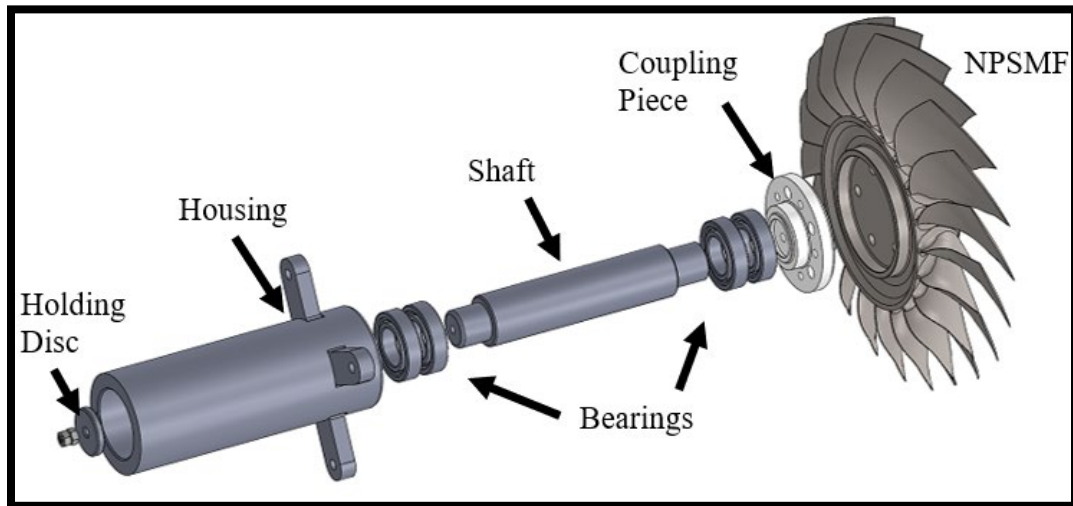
Exploded View of Shaft and Bearing House Assembly.
